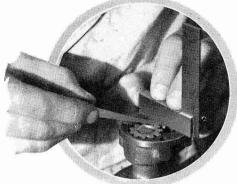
The method of checking the clearance between the pump gear teeth and the pump body is clearly shown in these illustrations.
